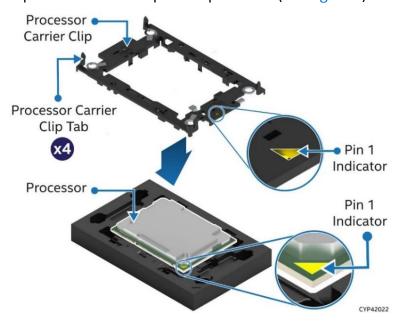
Installing Processor Carrier Clip onto Processor - Part 1
